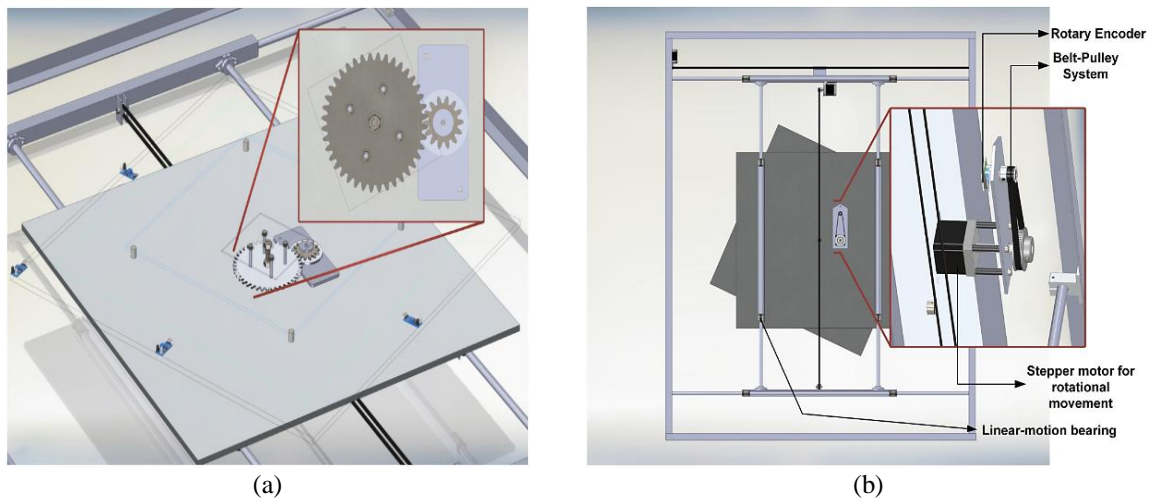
SolidWorks design of (a) the gear mechanism associated with the rotational base and (b) connection of the rotary encoder
